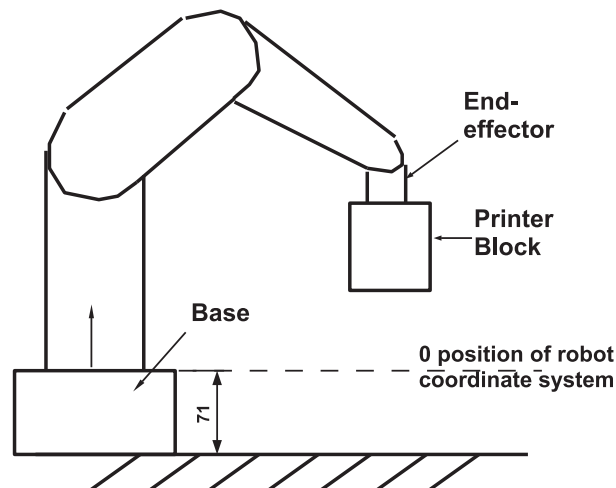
Schematic drawing of the mounting position of 3D printer block
